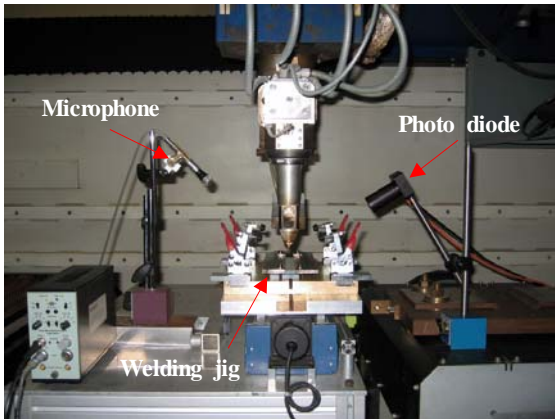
Experimental setup for signal measurement in laser welding.
